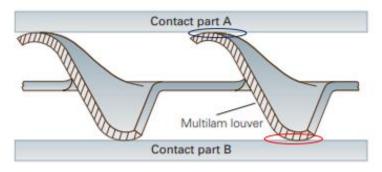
A cross section schematic of the one component torsion louver principal in a Multilam contact developed by Stäubli [10]
